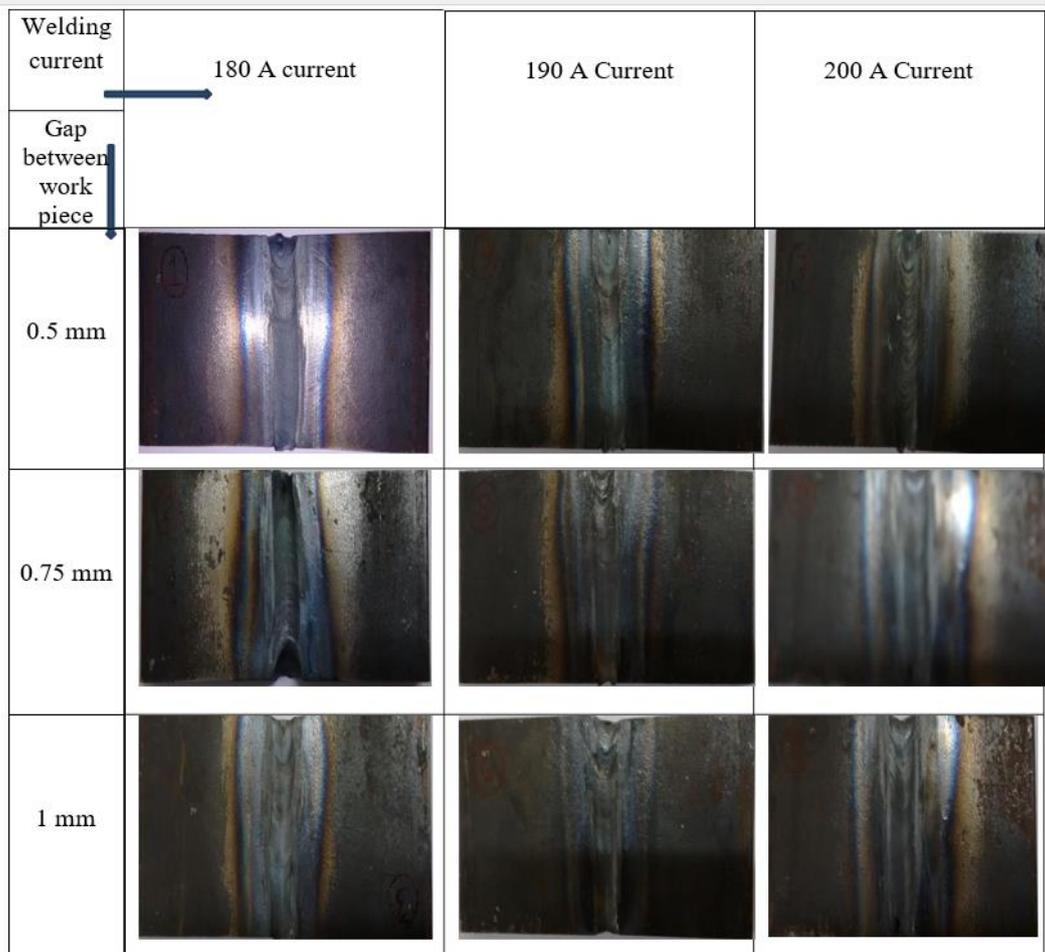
TIG welded specimens by varying gap between workpiece
